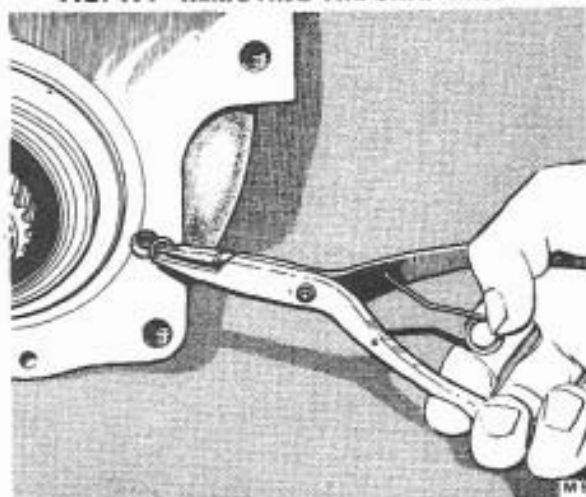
REMOVING THE PUMP LOCATING WASHER
